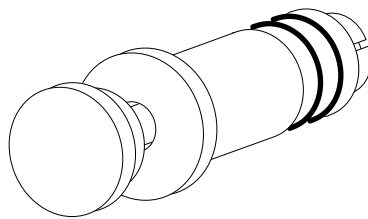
Inlet valve seal on the inlet valve seal tool
